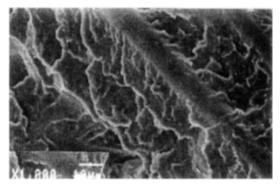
Fatigue crack initiation and propagation of PPS weld at interface of fiber and matrix
